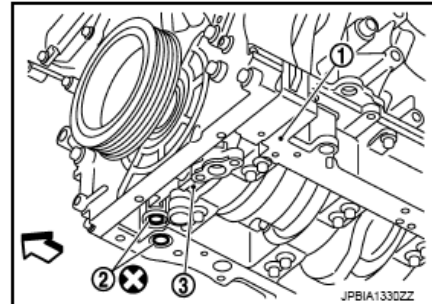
Identifying Lower Cylinder Block And Oil Pump O-Rings
